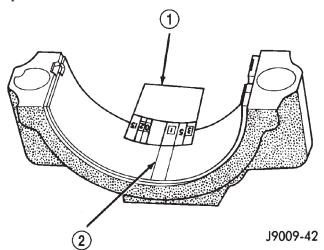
Measuring Bearing Clearance with Plastigage
